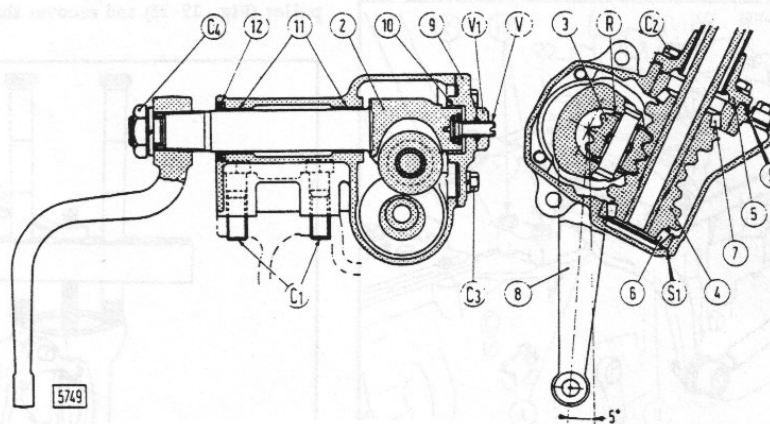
Steering box cross-sections. (C1) Steering box self-locking screws. (C2) Upper cover cap screws. (C3) Side cover cap screws. (C4) Steering arm (8) nut. (R) Nut thrust washers. (S) Worm bearings shims. (S1) Worm-and-nut setting shims. (V) Nut adjusting screw. (V1) Nut screw (V) locknut. (2) Nut shaft. (3) Nut. (4) Worm. (5) Upper cover. (6 & 7) Tapered roller bearings. (8) Steering arm. (9) Side cover. (10 & 11) Bushings. (12) Oil Seals.
